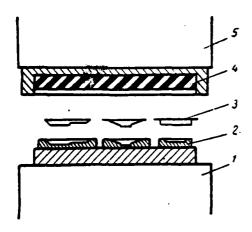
The schematic diagrams of stamping laminated parts by rubber: 1 - table; 2 - male die/punch; 3 - the part to be stamped; 4 - rubber block; 5 - the crosshead of press.
